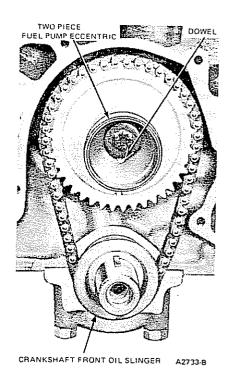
Fuel Pump Eccentric and Front Oil Slinger Installed
